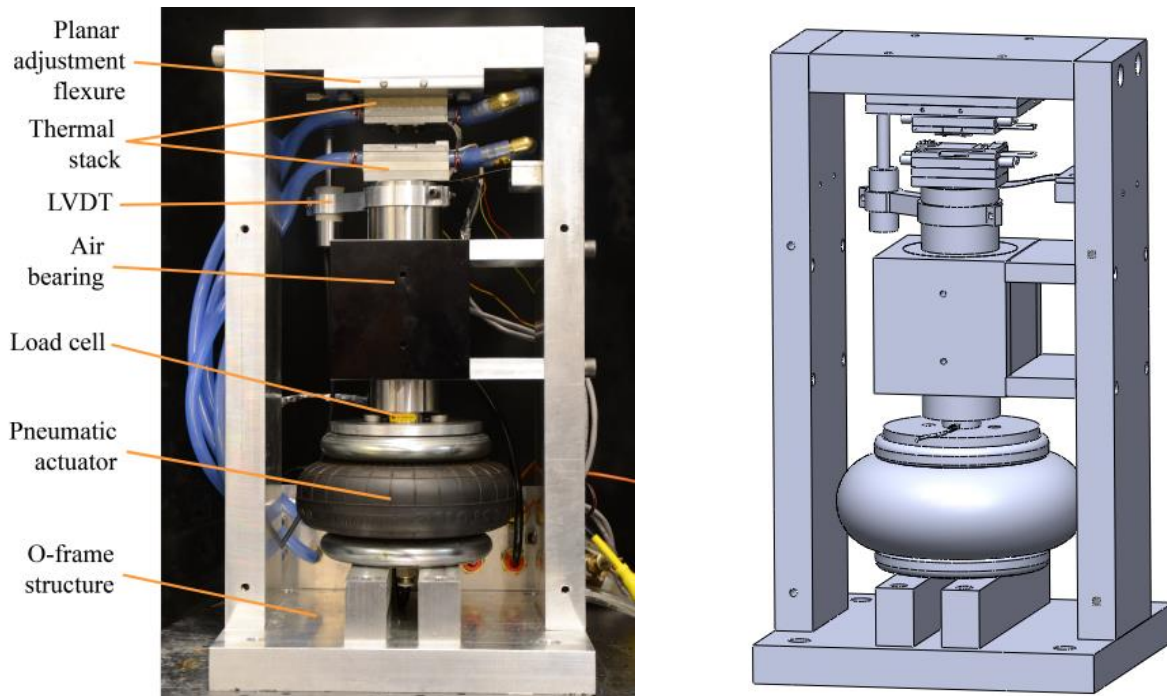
The current hot embossing machine design. Left: Photograph of machine with key parts labeled. Right: Solid model of the machine [7].
